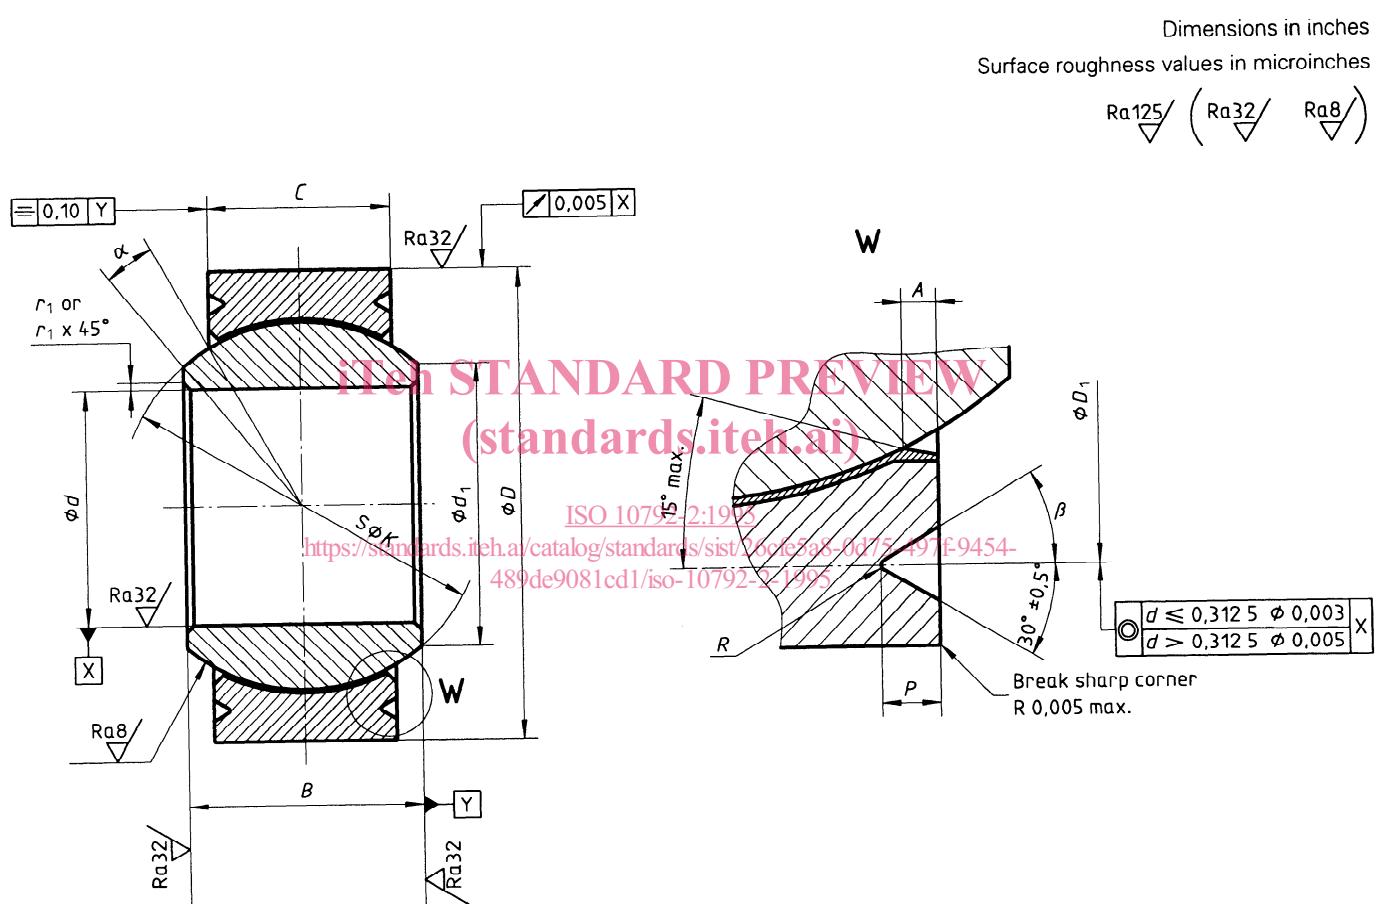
Spherical plain bearing with self-lubricating liner with face groove
